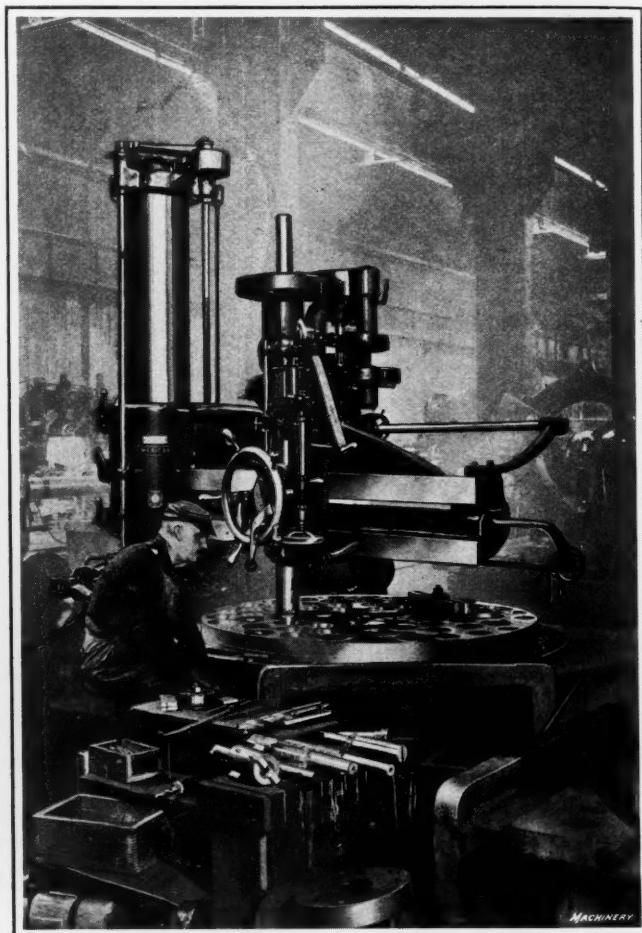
Radial Drilling Machine built by American Tool Works Co. engaged in Operation of machining Air-head of Mesta Blowing Engine
